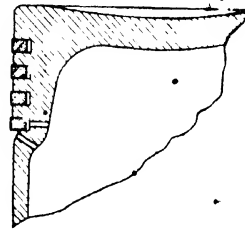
Section of Slipper Piston, with Scraper Ring vented by Holes drilled through Groove
